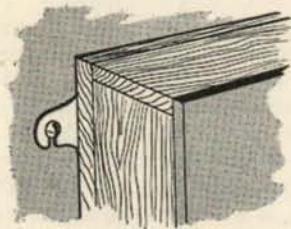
Mirror plates screwed to box-form units enable them to be mounted on vertical surfaces
